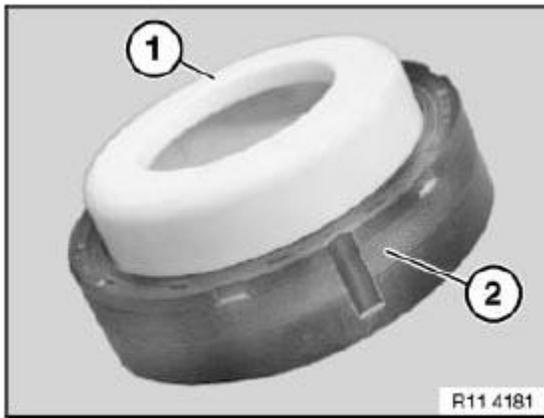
Identifying Crankshaft Seal And Support Sleeve
